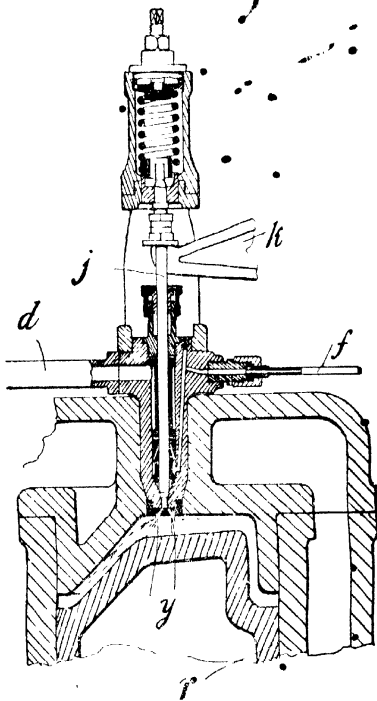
Cross sectional elevation, showing details of cylinder head, piston, and compressed air injection-atomiser valve used in the Polar-Diesel two stroke engine for residual oils.
